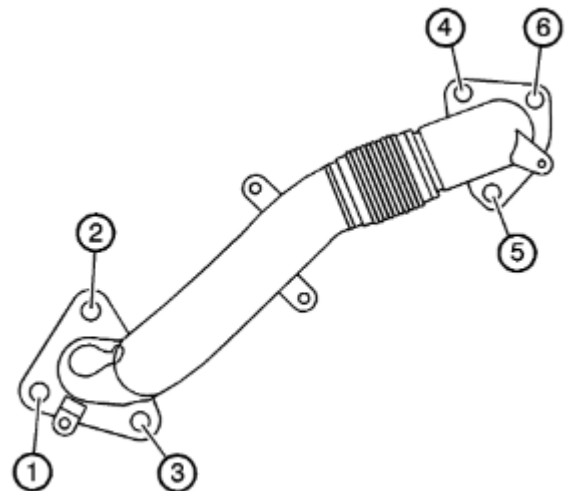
Driver's side exhaust up-pipe tightening sequence
